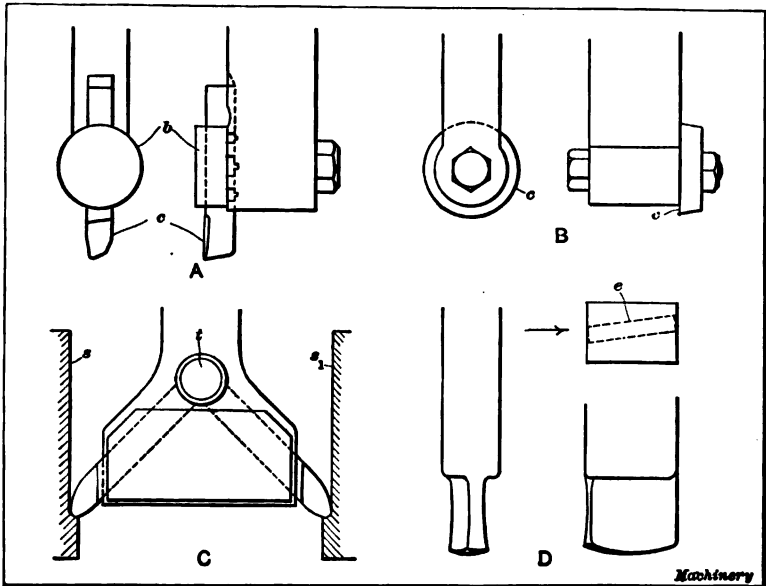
(A) Planing Tool with Inserted Cutter. (B) Radius Tool.
